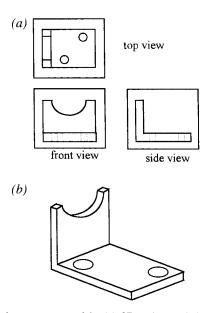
Workpieces represented in (a) 2D orthogonal drawing and (b) isometric drawing.
